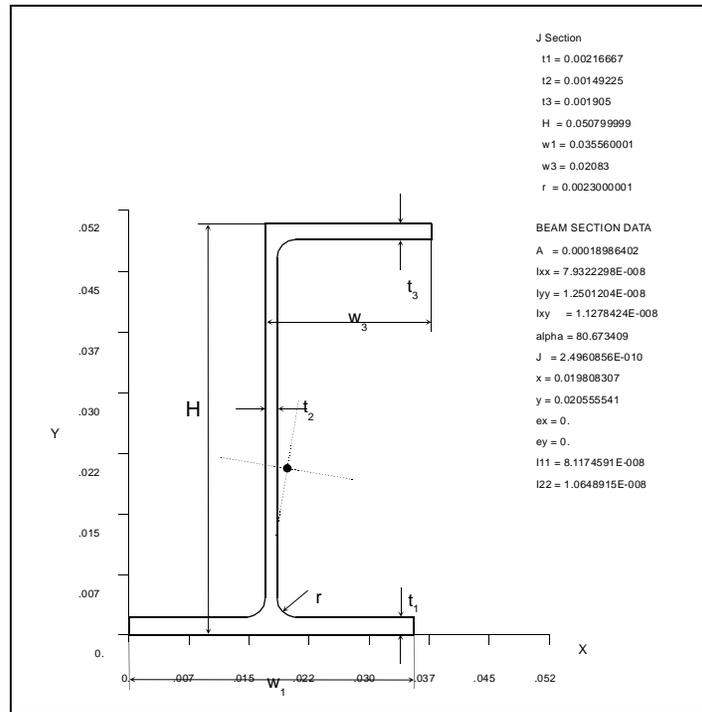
Cross-sectional properties of the ring frame beam elements (dimensions in m).
